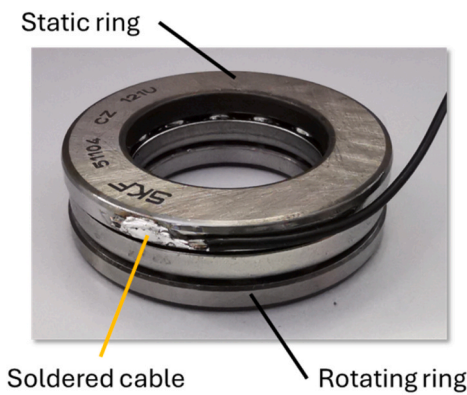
ECR wire tin-soldered to the static ring of a 51104 bearing.
